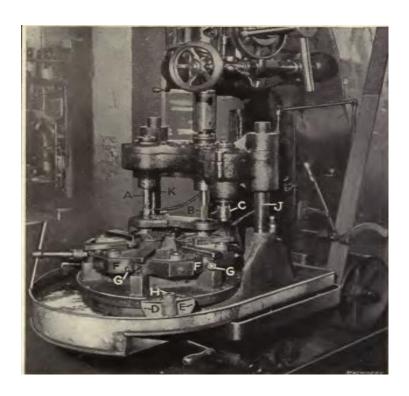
High duty drilling machine equipped with indexing fixture and special three spindle head for drilling, reaming, and facing
